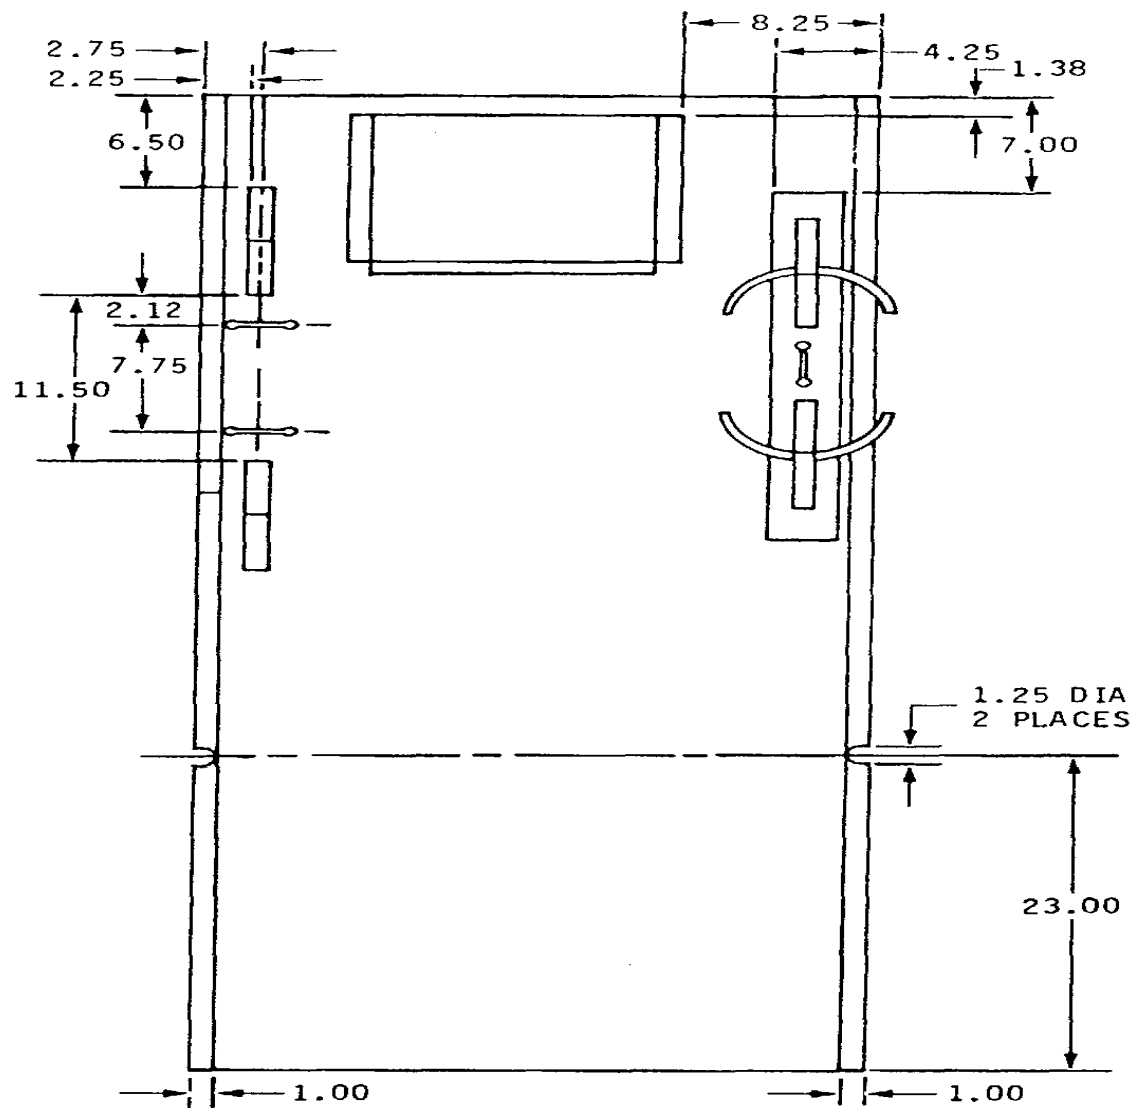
Location of relocated components of modified front panel assembly, unit 1, 280.
